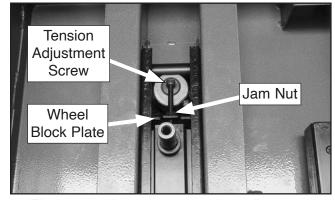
Location of tension adjustment screw, jam nut, and wheel block plate.
